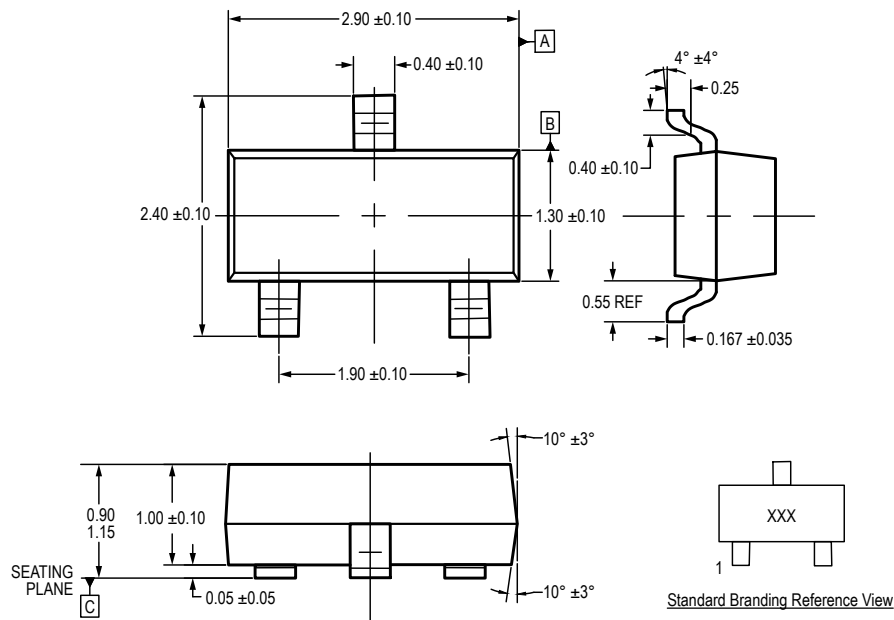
Package MD, 3-Pin SMD (SOT23-3)
